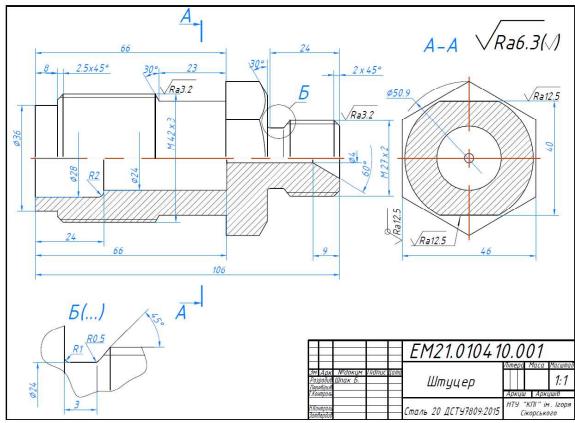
An example of detailing the drawing of the general type of device shown in Fig. 1. Working drawing of the "fitting" part
